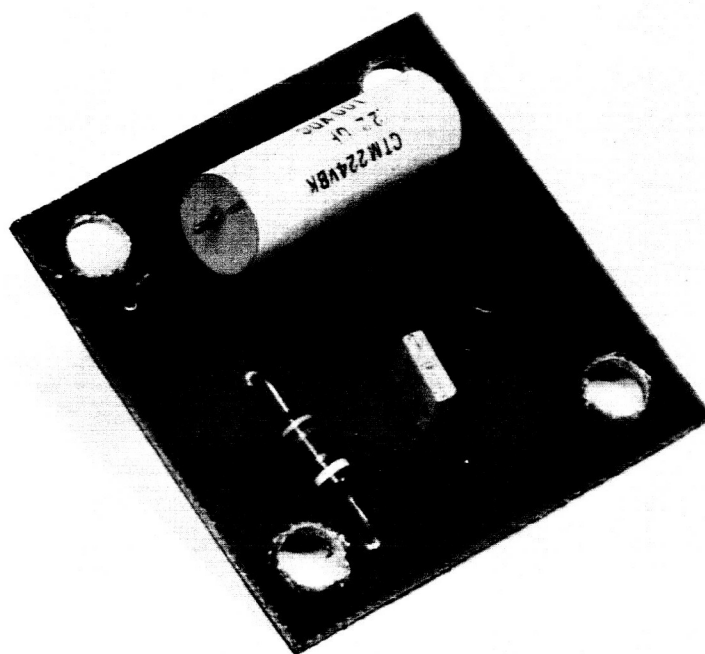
Inactive Component Circuit Board Used in Environmental Tests
